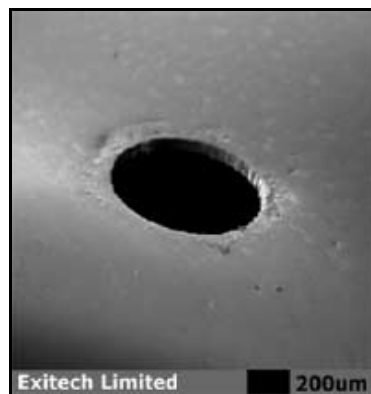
A thin sheet of stainless steel machined with a short pulse laser.
